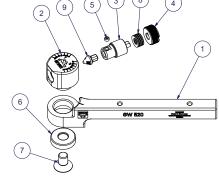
Exploded diagram of CNC-lathe version GW520-16U
